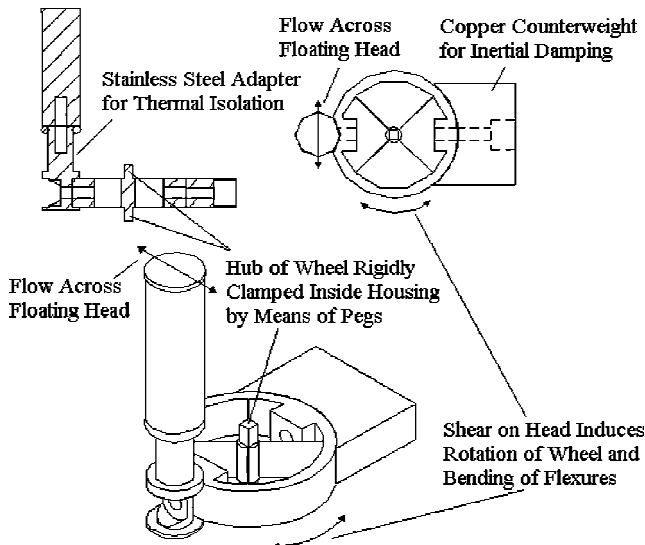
Internal components of skin-friction sensor final design: floating head, adapter, flexure ring, and counterweight.
